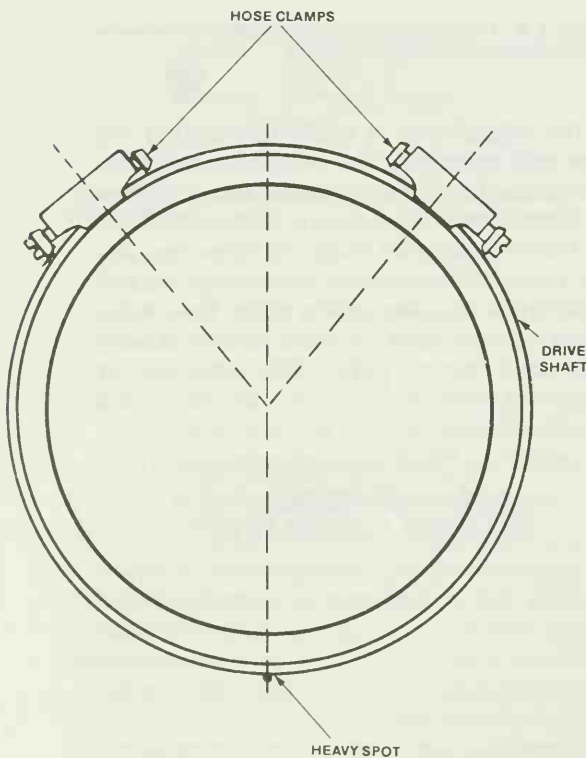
Hose clamps may be used to balance a drive shaft. (American Motors Corporation)
